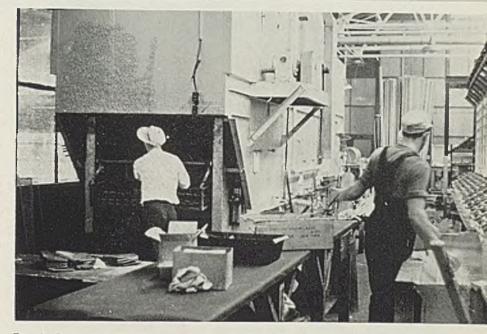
Production finishing equipment employed at metal finishing department of Curtiss Aeroplane division, Curtiss-Wright Corp., Buffalo. At left is the production continuous cleaning machine. Right is the loading station of the conveyor dryng unit used to dry the primer after dipping the small parts in it
